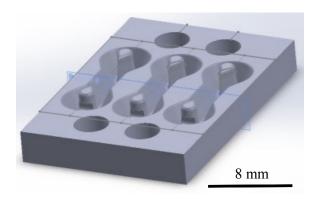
CAD DESIGN OF TISSUE MOLD
